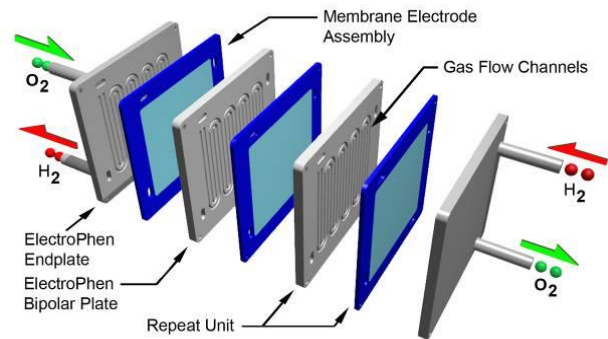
Exploded diagram of a fuel cell stack showing composite bipolar plates
